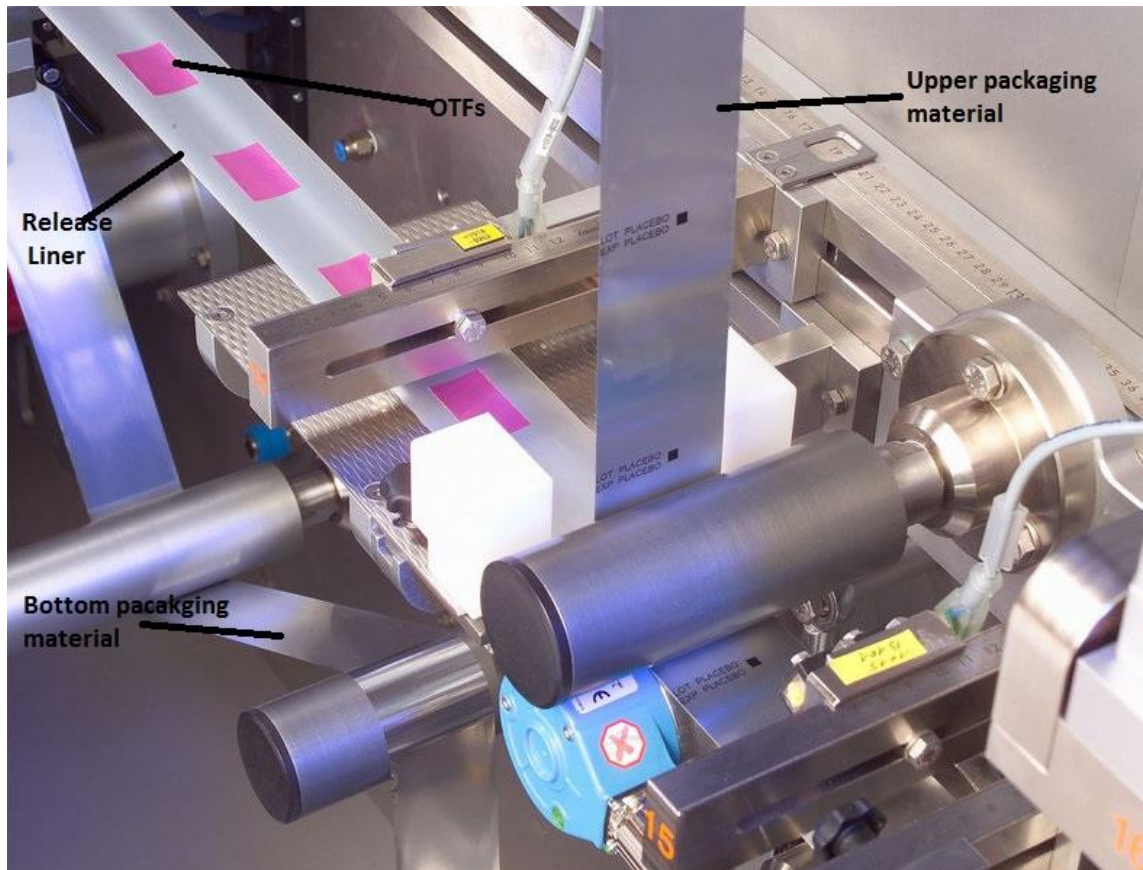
Detail of a primary packaging machine. The OTFs strips already cut on the top of the release liner are then trasfered to the bottom packaging material and closed with the upper packaging material. (image from supplier P.D).
